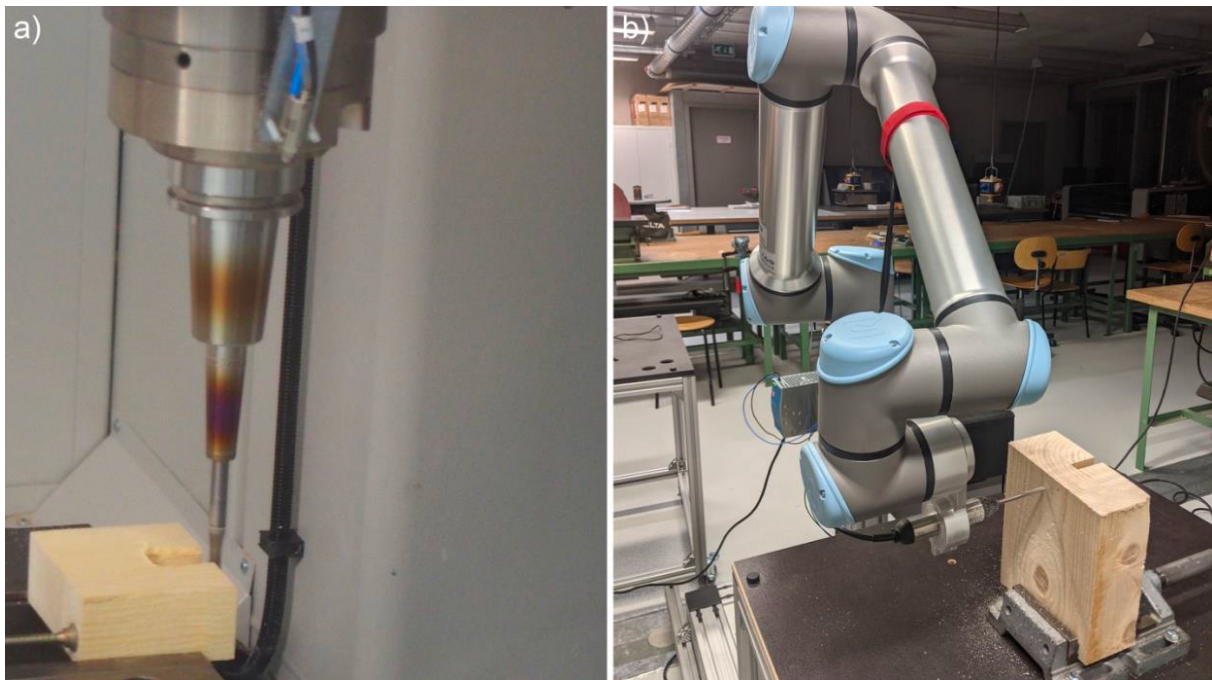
Digital Fabrication Setups: a) Maka 5-Axis CNC Machine, Milling a Specimen for the Strength Tests. b) UR10e Robotic Arm, Milling the Joint of an Offcut for the Prototype With a Custom End-Effector. 2022.
